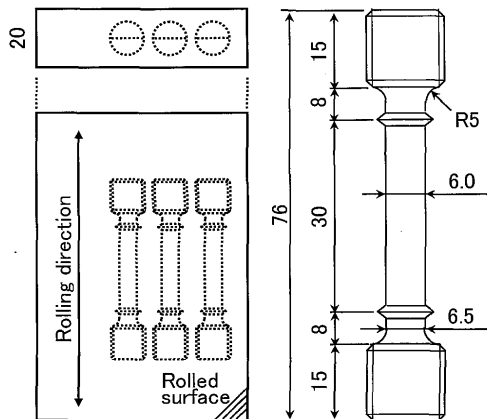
Schematic of machining location and shape of the creep test specimen.
